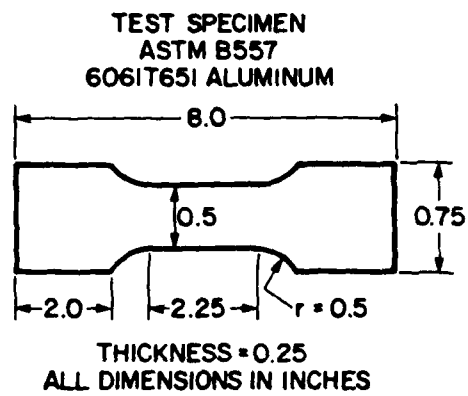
Dimensions of 6061 T651 aluminum tensile test specimen (coupon) prepared to ASTM B557 specifications.
